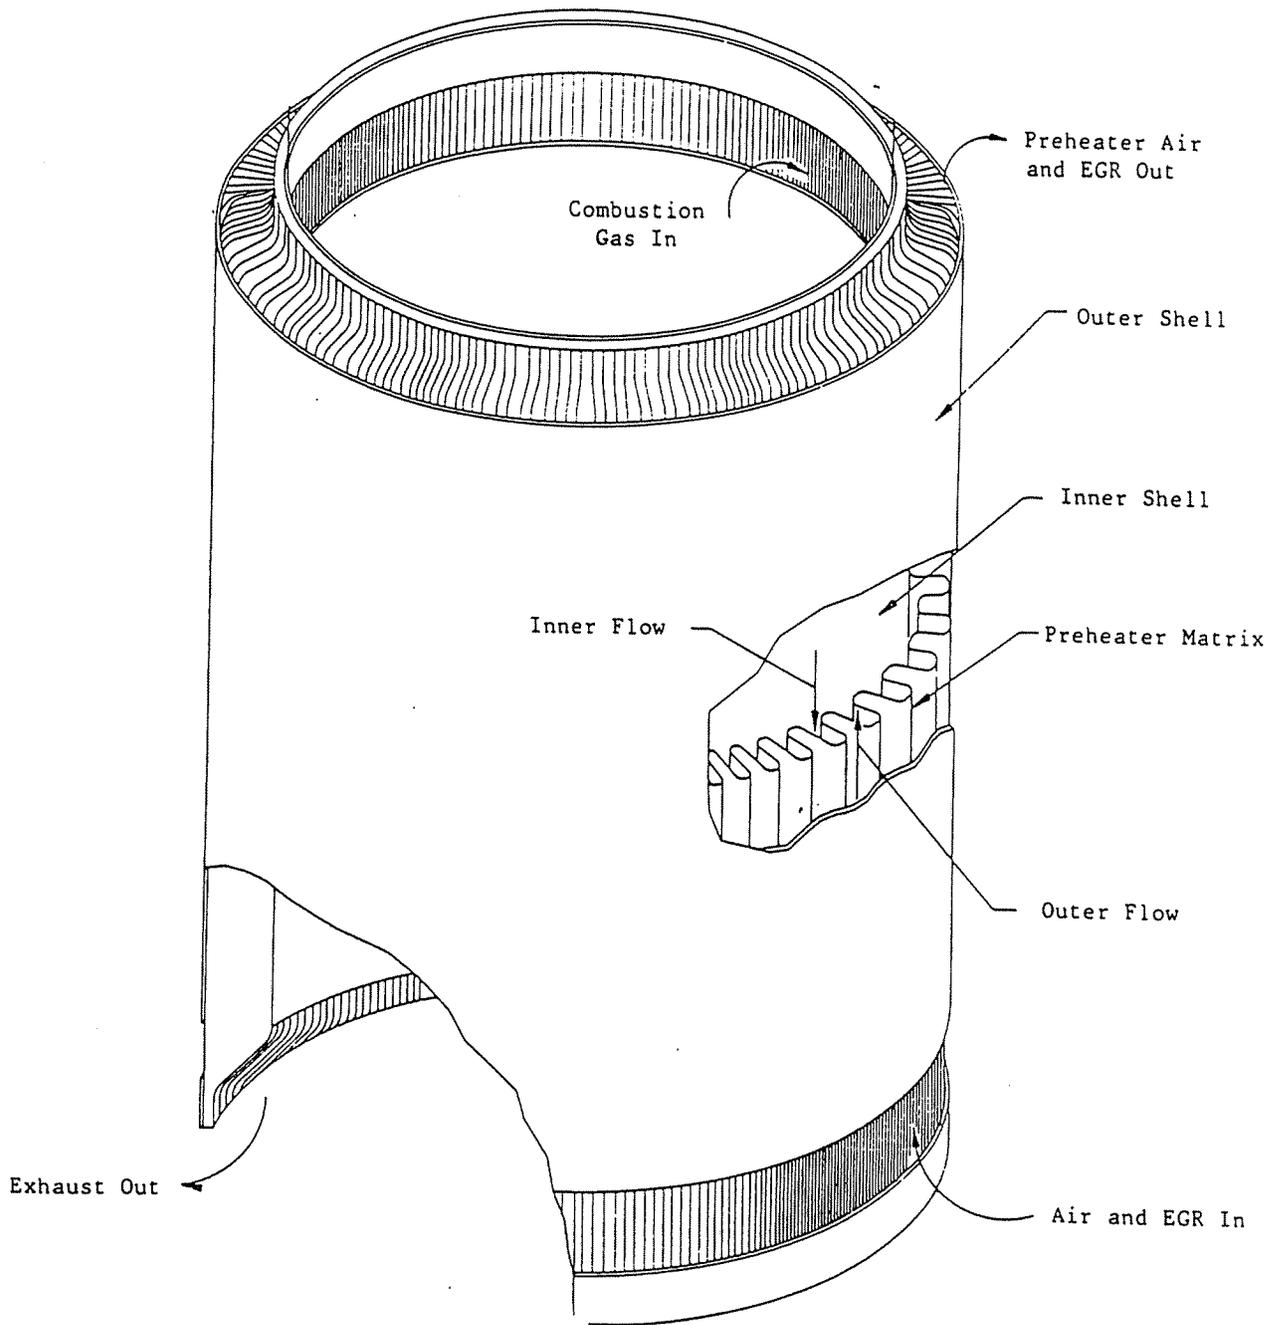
Mechanical Technology, Inc., preheater design.
